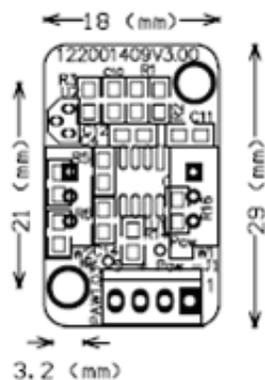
Paw Pressure Sensor Board, Top View
